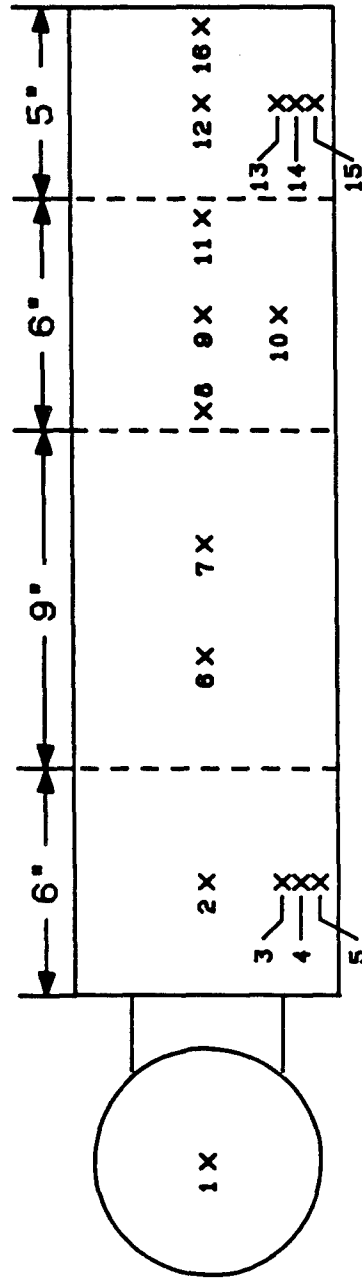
Top view of test plate castings indicating thermocouple positions.
